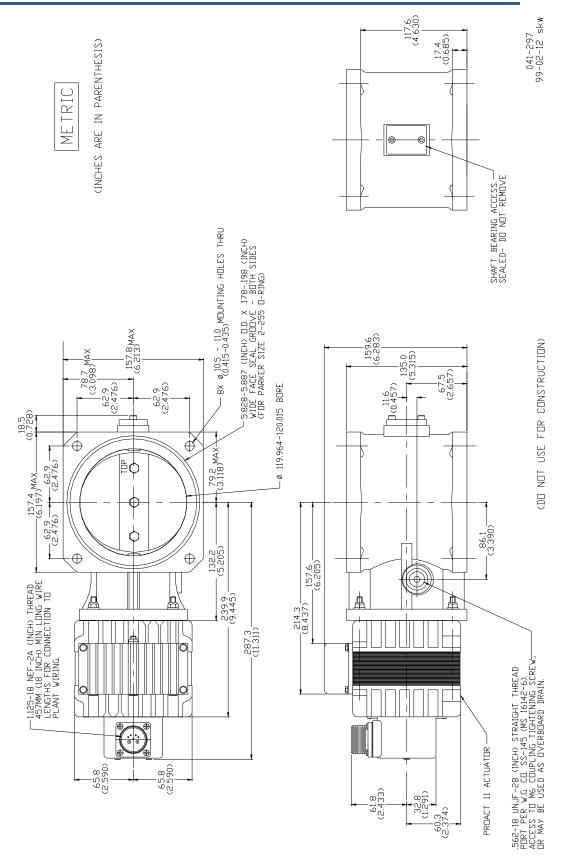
Outline Drawing of Flo-Tech 120 with ProAct II Actuator
